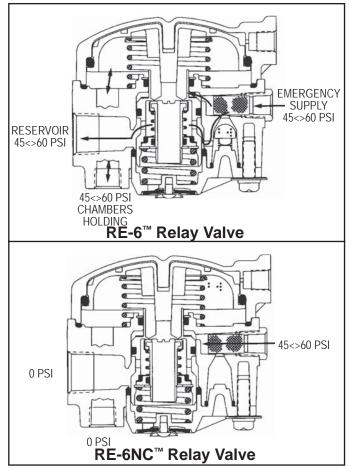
RE-6 $^{\text{\tiny TM}}$ & RE-6NC $^{\text{\tiny TM}}$ RELAY VALVES CHARGING HOLD POSITION
